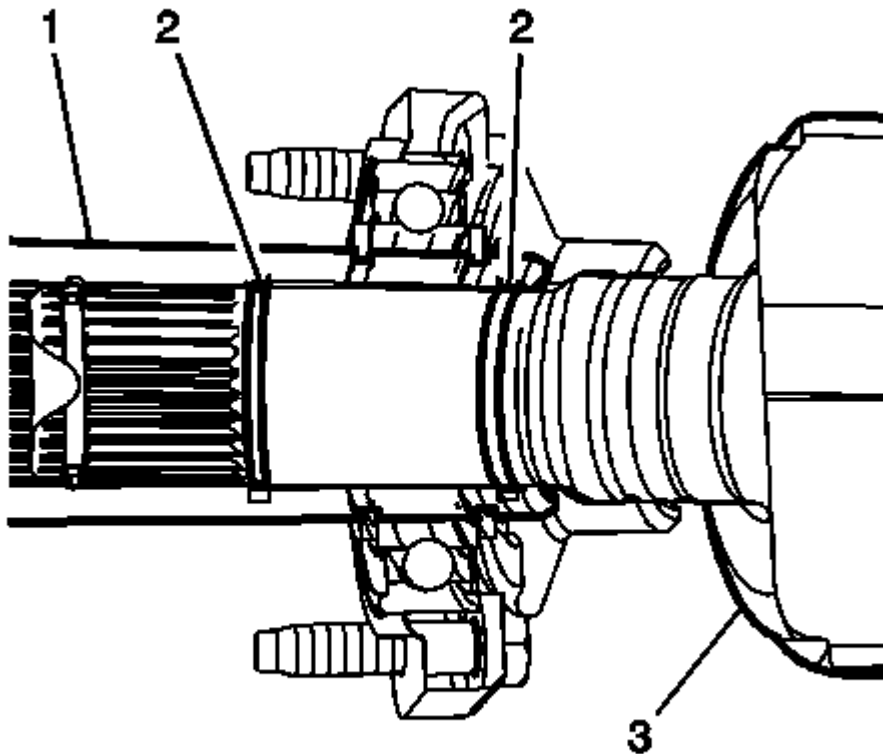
Intermediate Shaft, Wheel Drive Shaft & O-Rings
